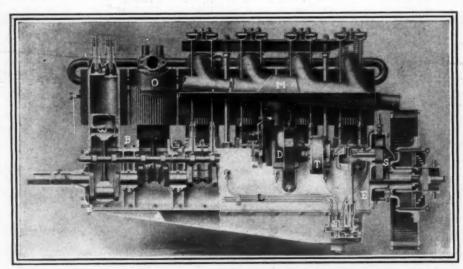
Longitudinal view and part section of Franklin air-cooled motor
